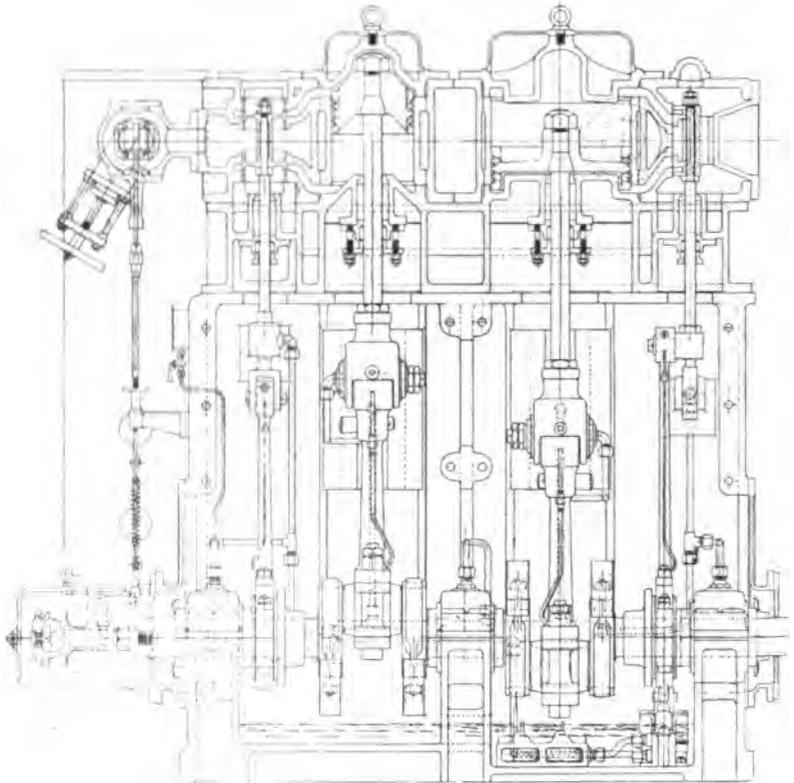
SECTIONAL VIEW OF MESSRS. ROBEY & CO.'S COMPOUND ENCLOSED, FORCED LUBRICATION ENGINE.
